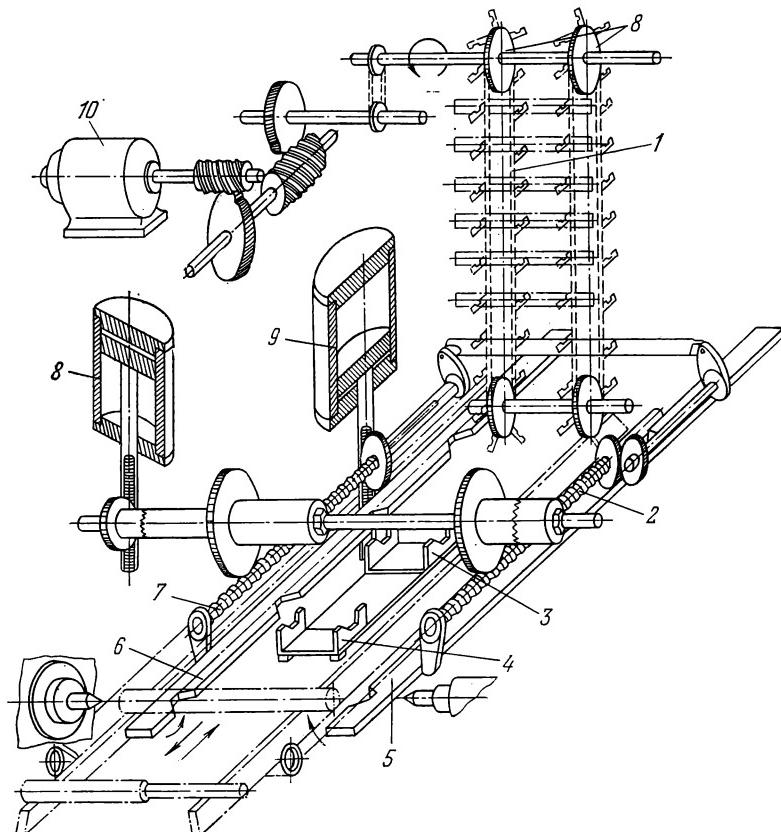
Principle of the loading mechanism for the model MP-107 hydraulic tracer-controlled lathe
